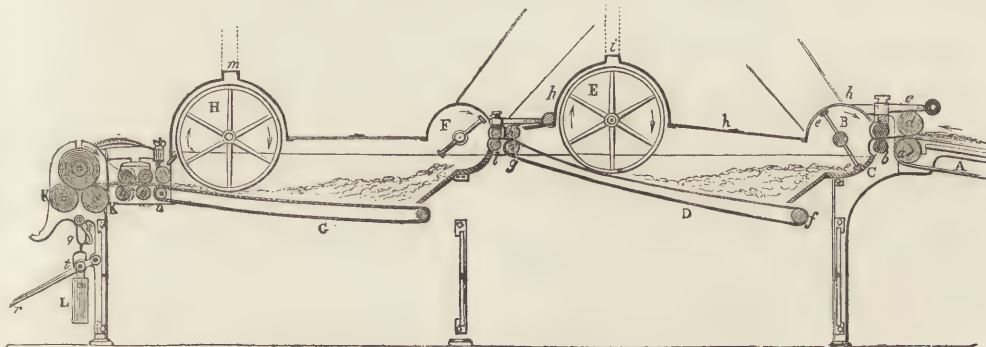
SECTION OF BATTING AND LAPPING MACHINE.
